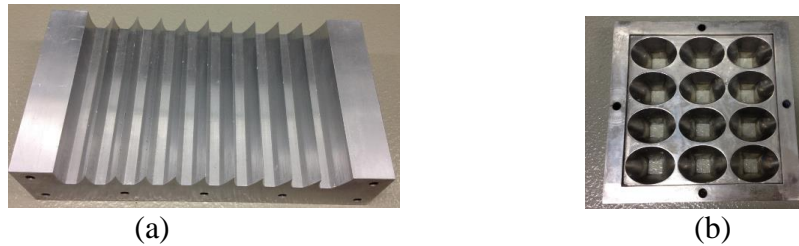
Stainless steel casting moulds for (a) LACPC and (b) SEH concentrators.
